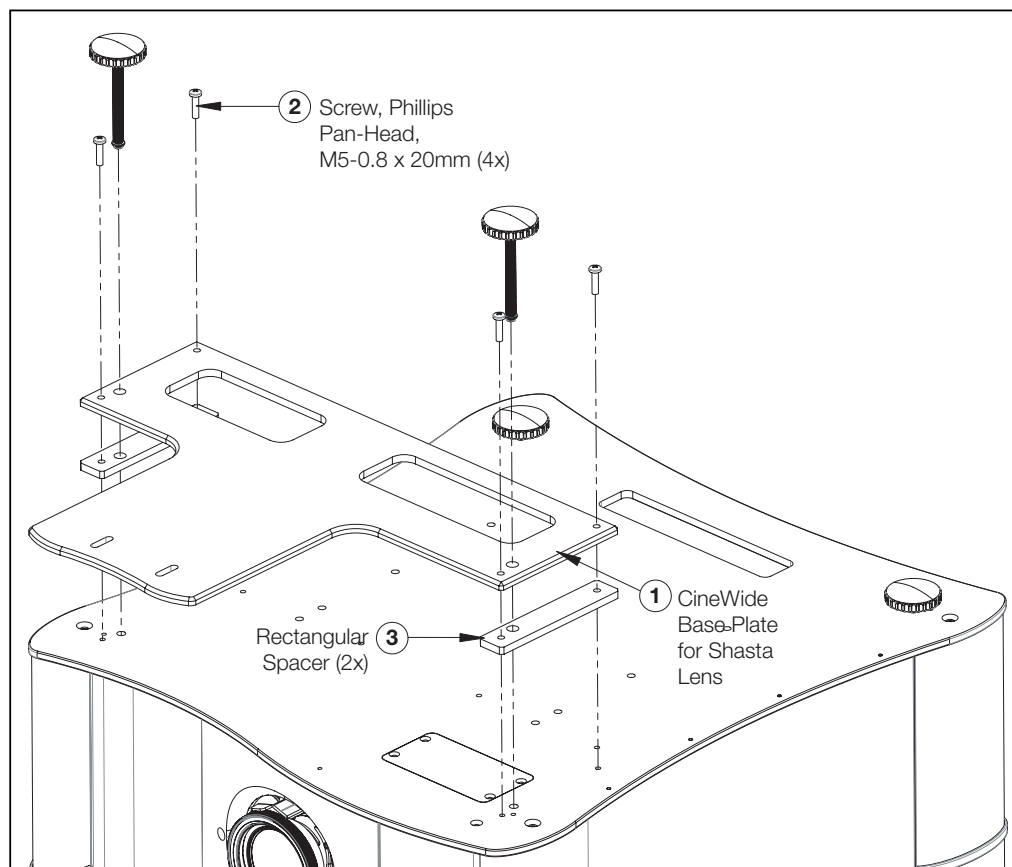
Q-1500d/CineWide with Shasta Anamorphic Lens Base Plate - Exploded View
